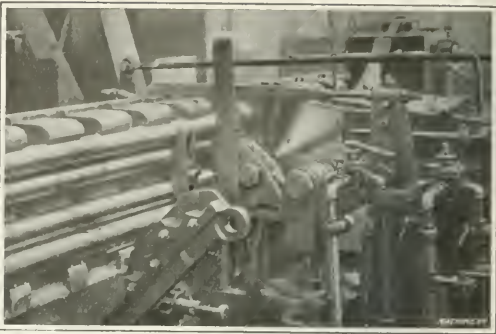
Cutting Turned Bars to Shell Lengths in a Newton Cold Sawing Machine
